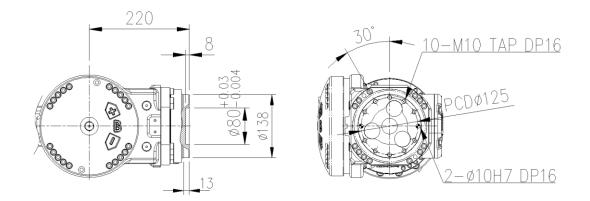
Detailed Diagram of the Wrist Axis Attachment Surface
